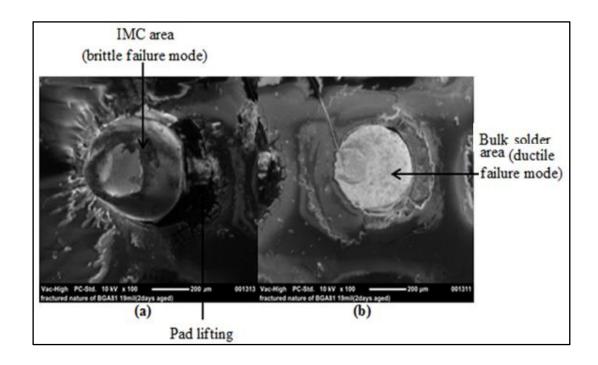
SEM images of failure classification, for 2-days aged 19mil pad size, with (a) IMC fracture and pad lifting solder joint, and (b) bulk solder fracture mode
